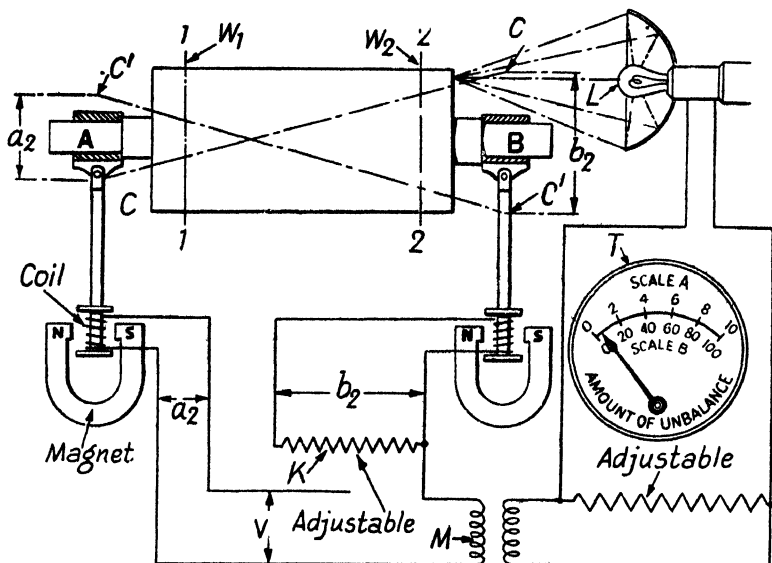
SCHEMATIC LAYOUT OF GISHOLT TYPE "S" ELECTRICAL BALANCING MACHINE
